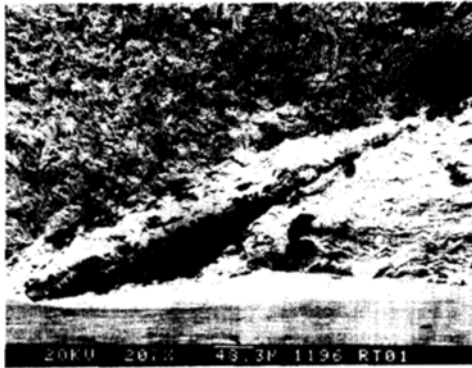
View of fracture surface tested at 637 MPa.
